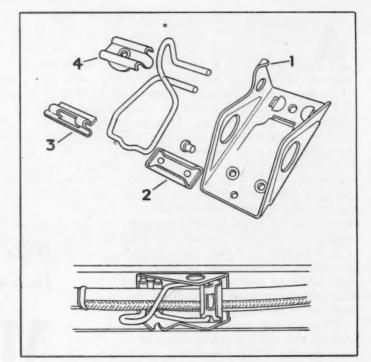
"Mouse trap" type of clip used to secure electric cables in their conduits.
